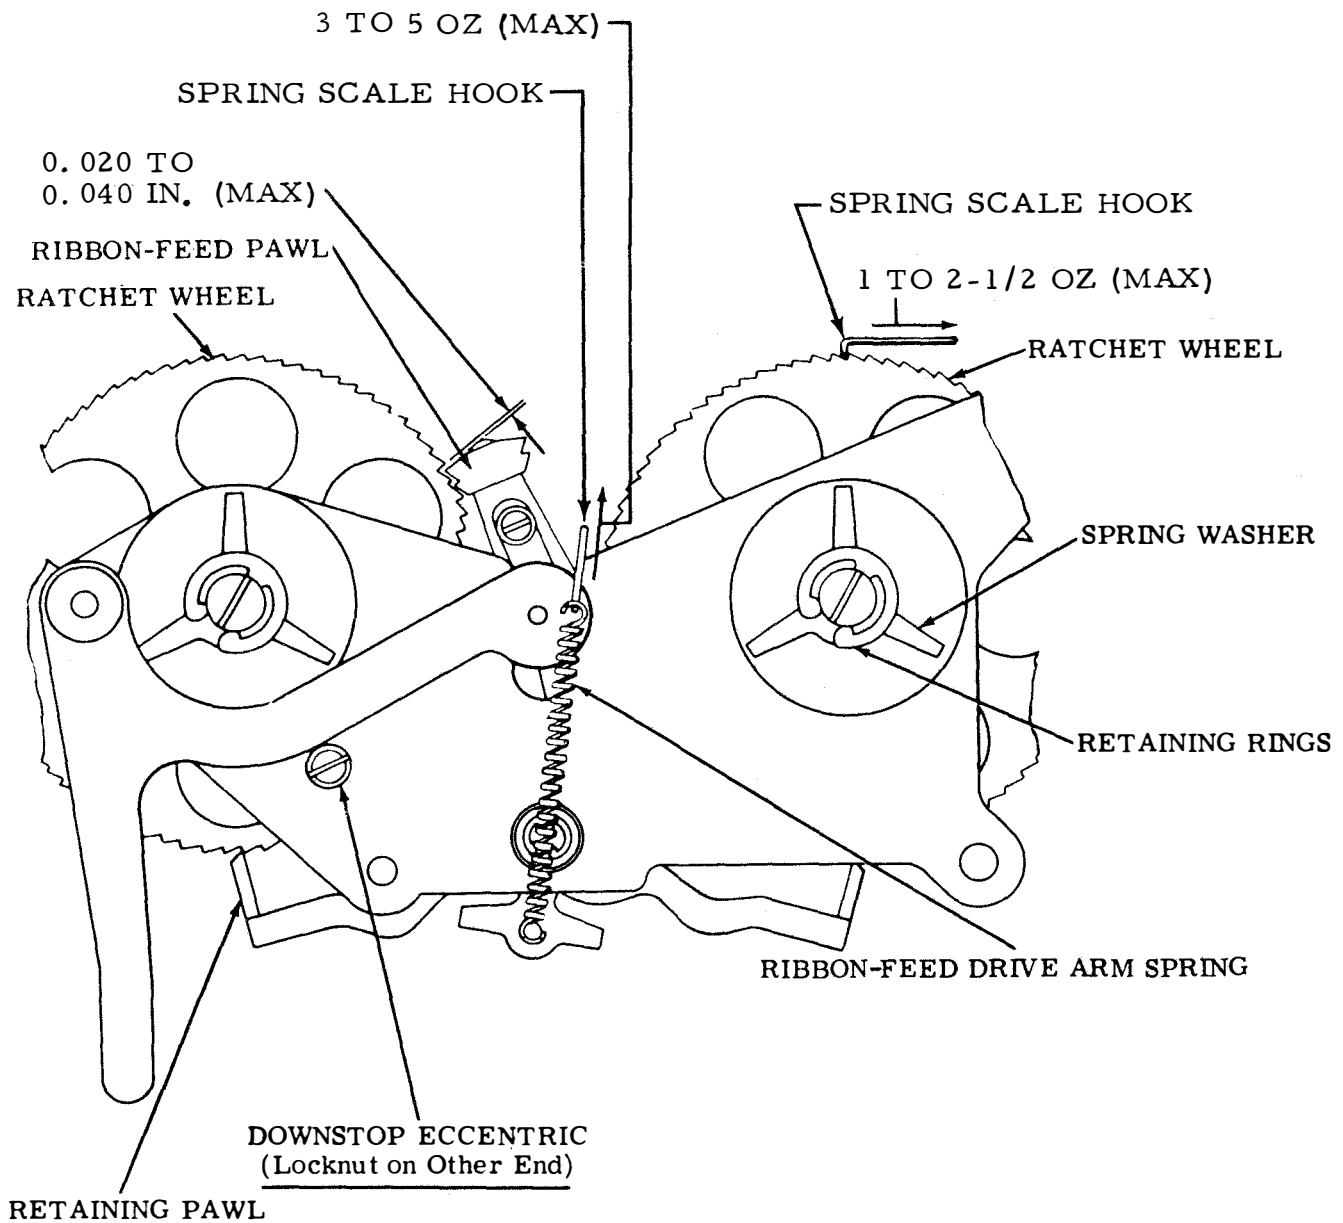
Ribbon-Feed Drive Arm Spring, Ribbon-Feed Pawl Downstop Eccentric, and Ribbon Ratchet Wheel Spring Washers, Reperforator, Rear View
